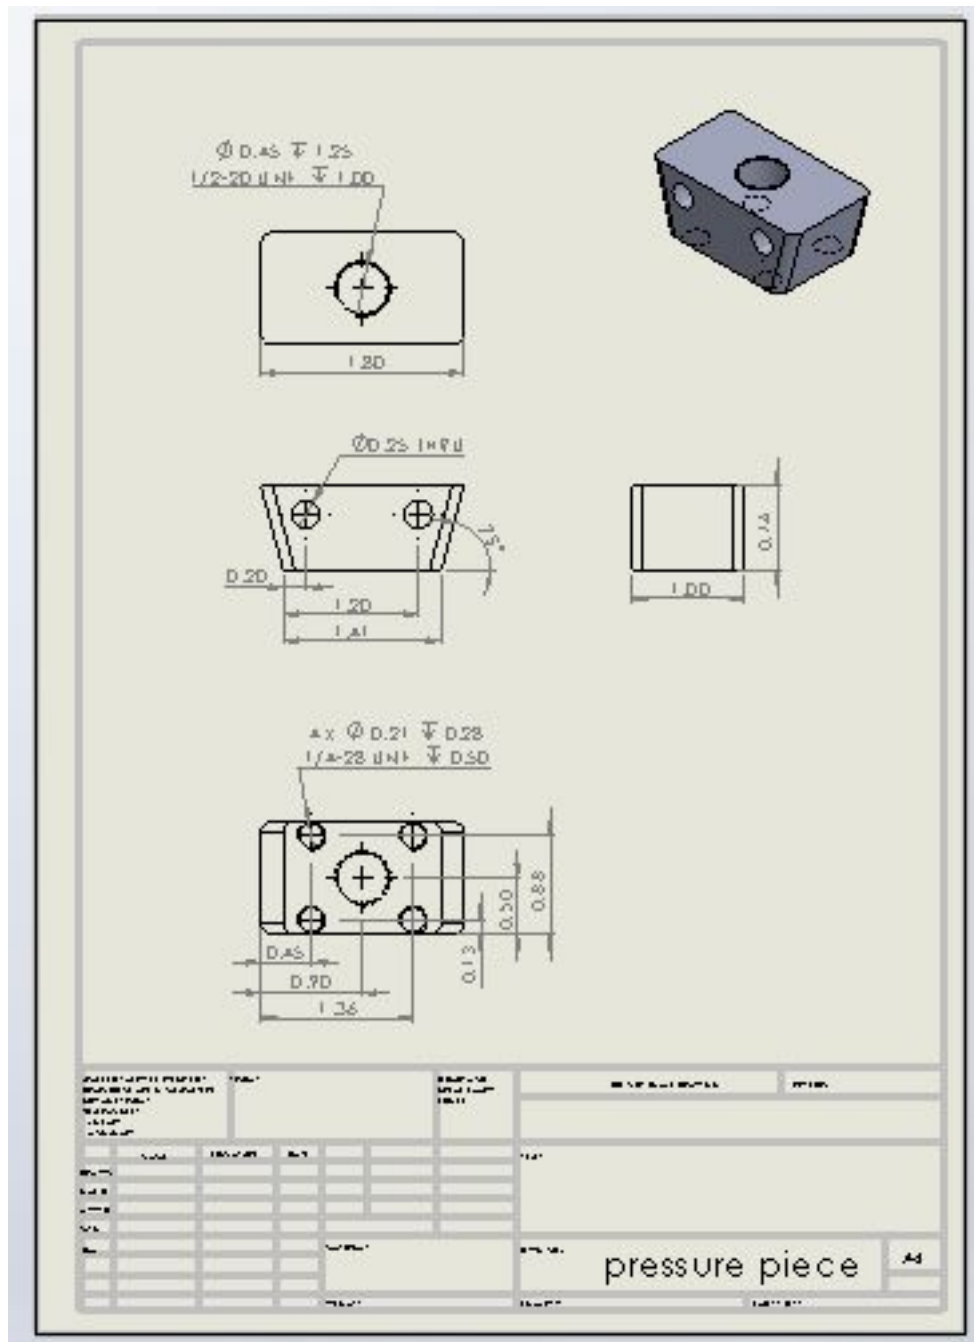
Dimensioned drawing of pressure piece for ligament attachment fixture.
